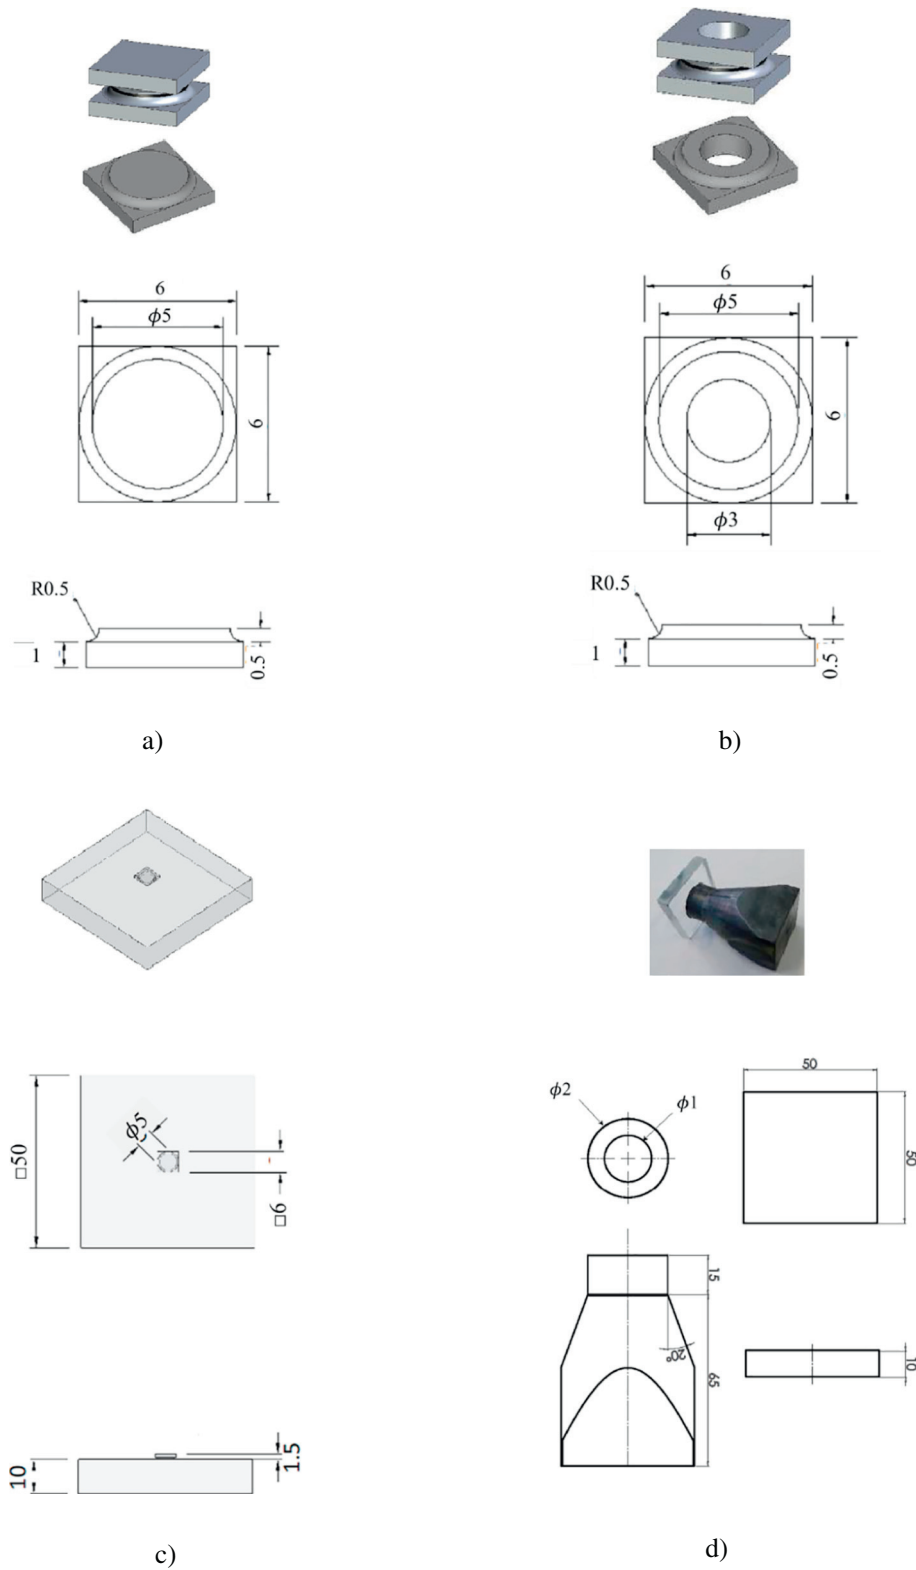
Size and shape of joined samples tested in torsion: a) full joined steel hourglass (Steel-Steel-full-joined-HourGlass, SSfHG); b) ring-shaped steel hourglass (Steel-Steel-ring-shaped-HourGlass, SSrHG); c) half hourglass joined to a glass plate (Steel-Glass-half-HourGlass, SGhHG); d) full-scale ($\phi_2 = 30$ mm) ring-shaped steel fixture joined to a glass plate (Steel-Glass-ring-shaped-Full-Scale, SGrFS, with diameter ratios $\phi_1/\phi_2 = 0.40, 0.53, 0.67, 0.80$).
